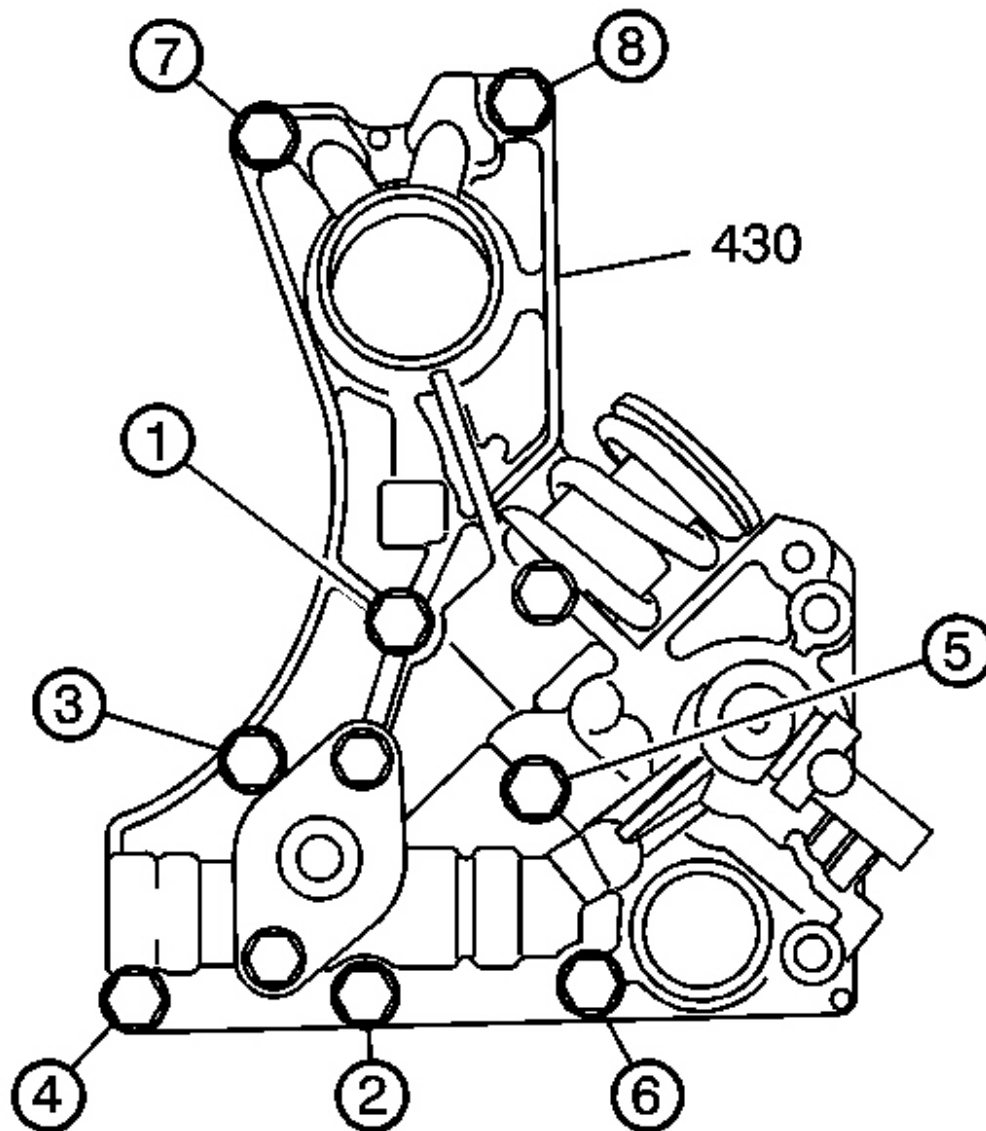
Tightening The Regulator Valve Body Assembly In Sequence
